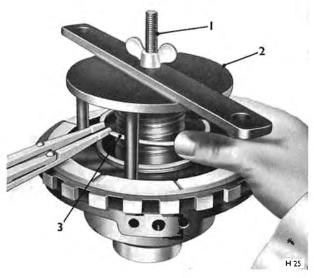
Removing and fitting the intermediate clutch piston snap ring
